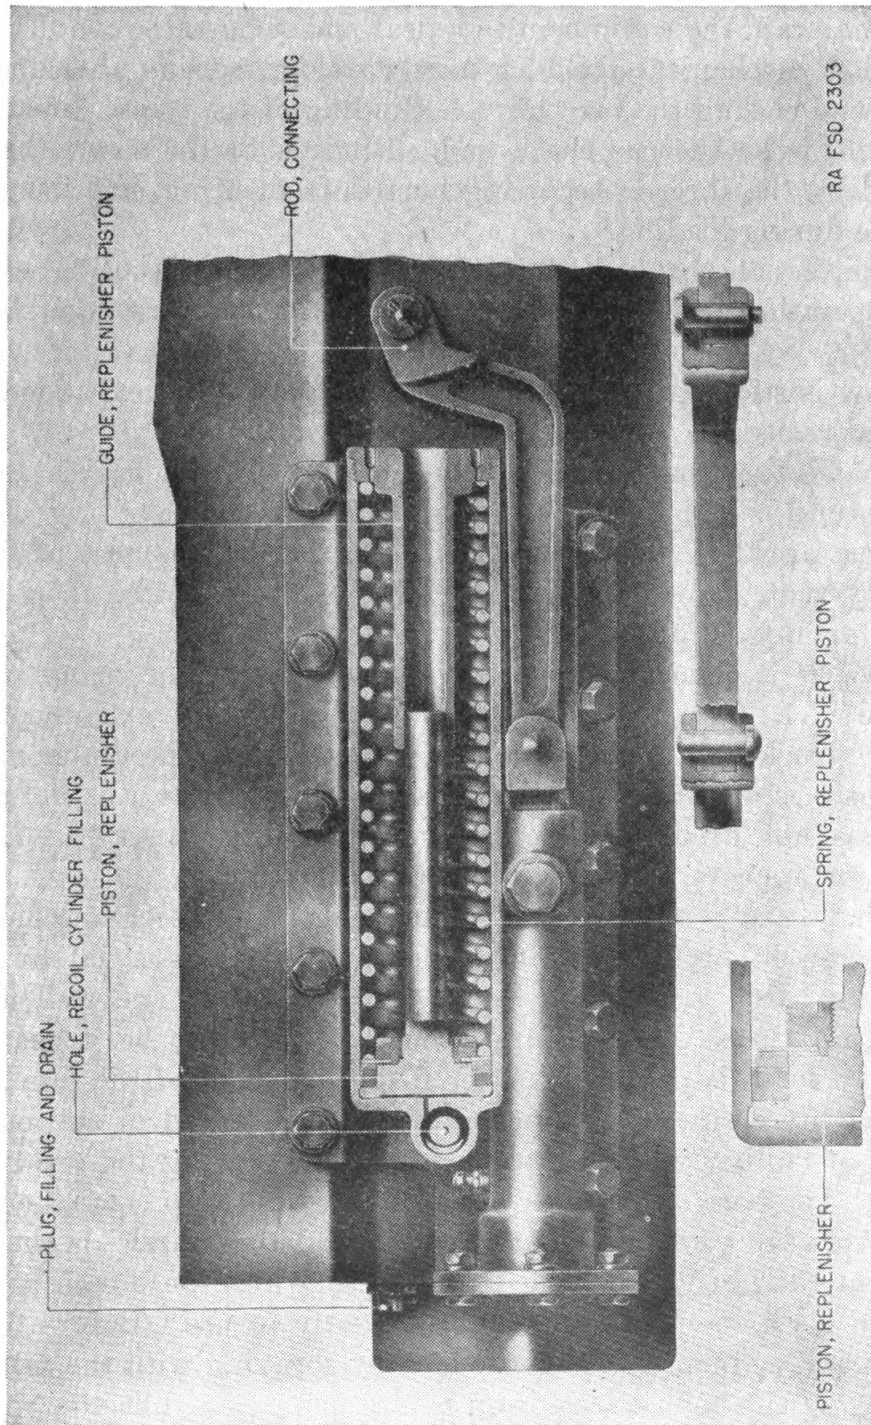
Replenisher, 155-mm gun M1918—assembled view.
